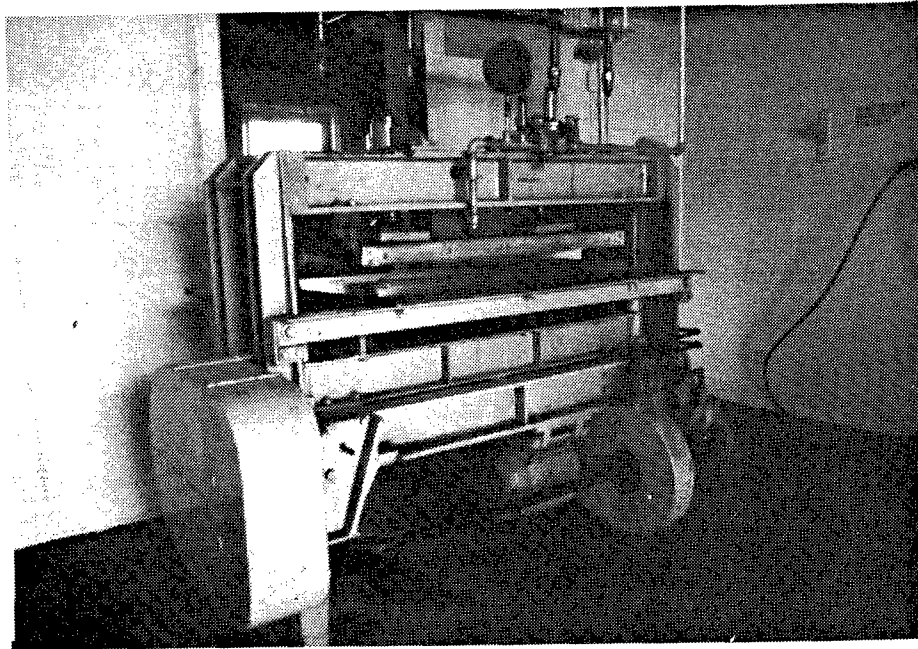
Building 9309-04: Sheet powder cutting machine on which propellant sheet stock was slit into strips and prepared into rolls.
